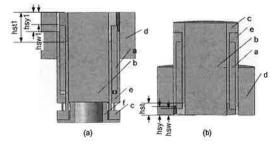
Two typical assembled status of the die for compaction of stator core for claw pole machine.
